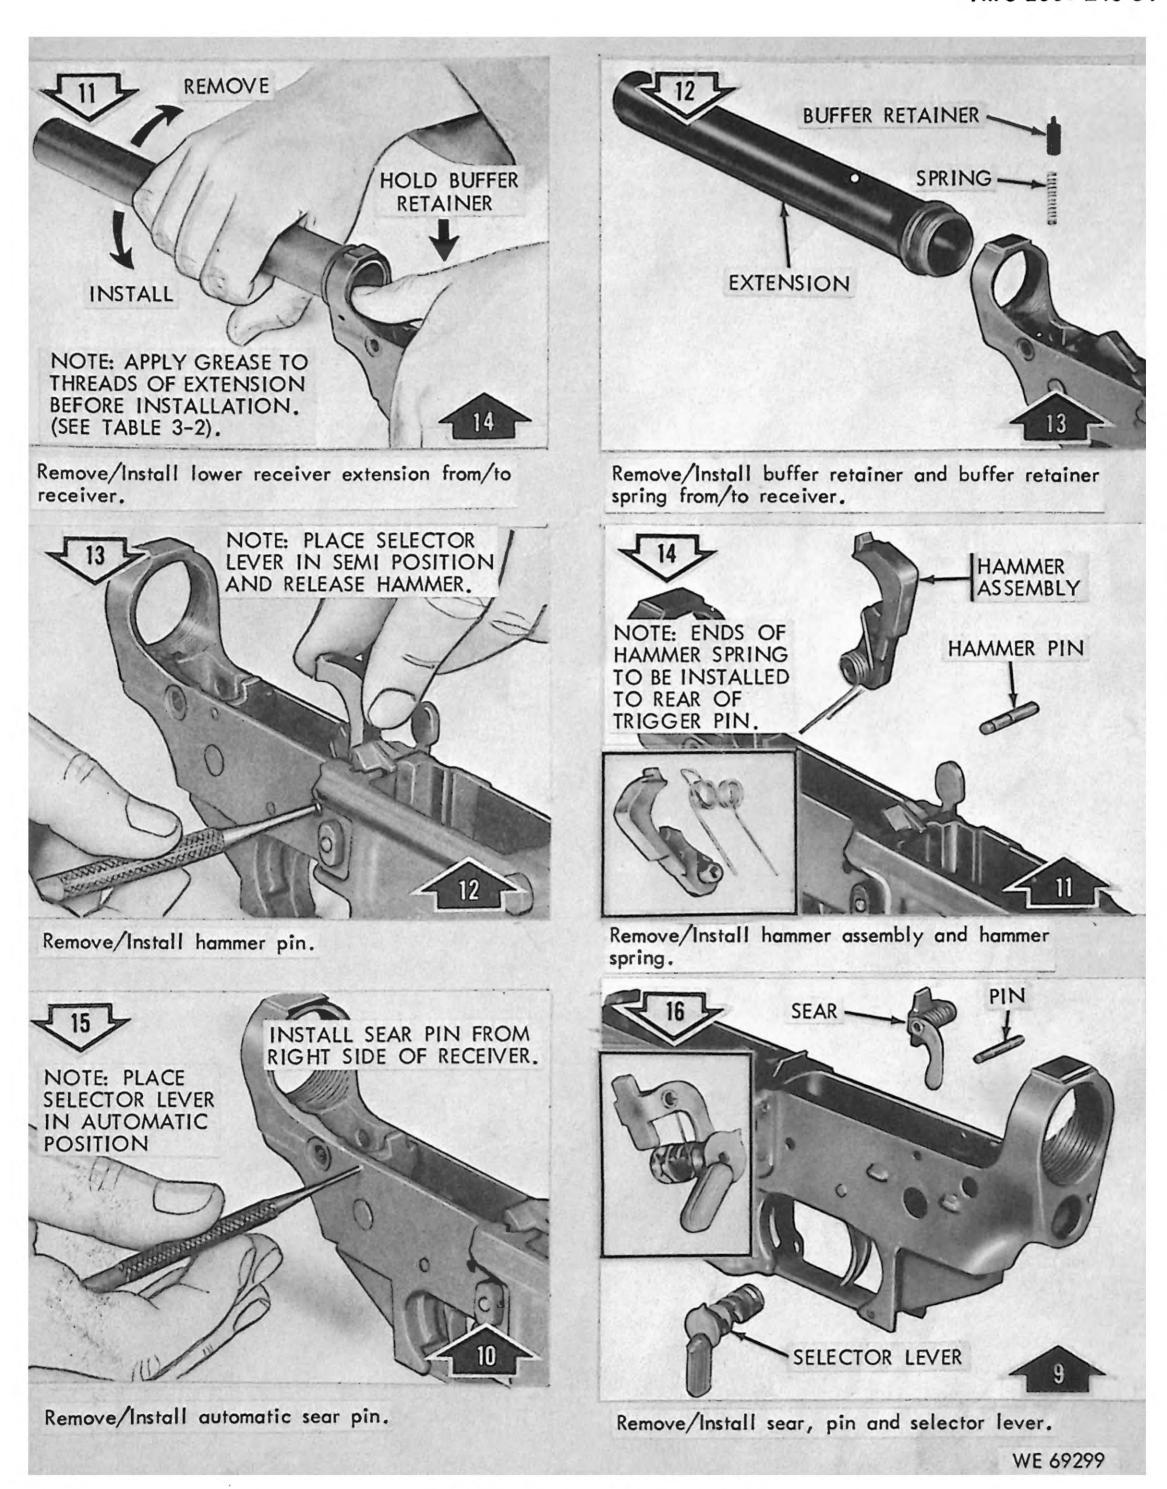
Disassembly/assembly of lower receiver group. (3 of 5)
